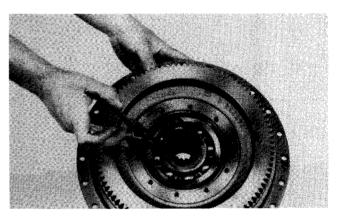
Remove turbine hub to impeller cover bearing retainer ring.
